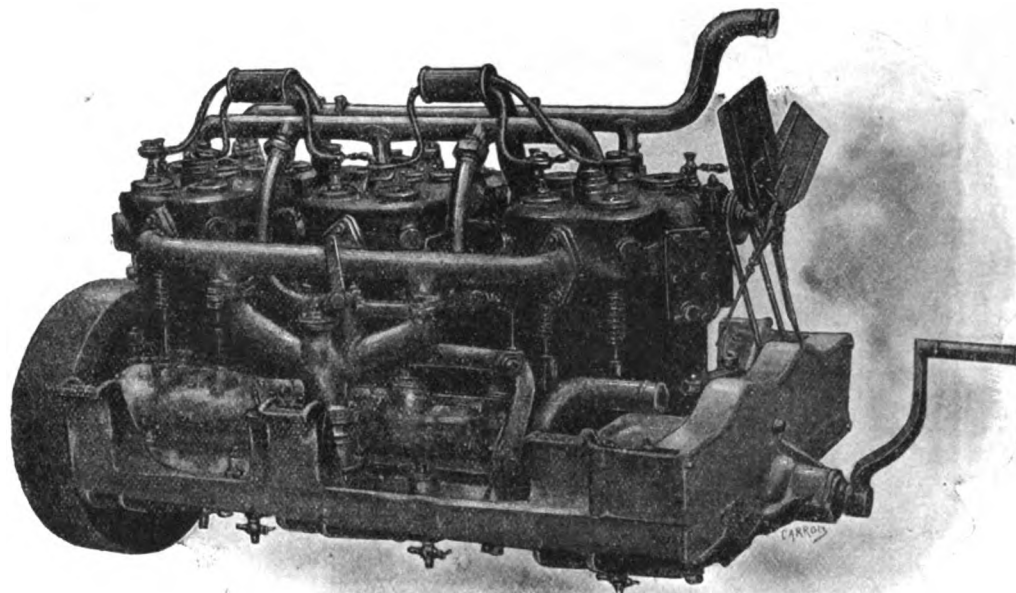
View of Hotchkiss Six-Cylinder Engine.
